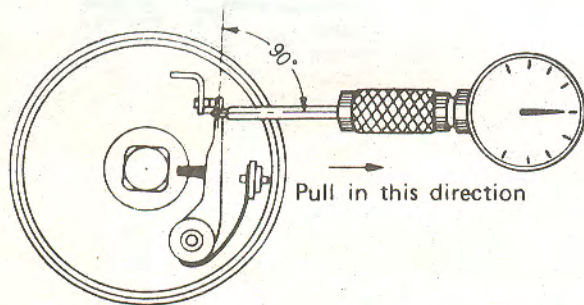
Checking the tension of the contact breaker arm spring.
